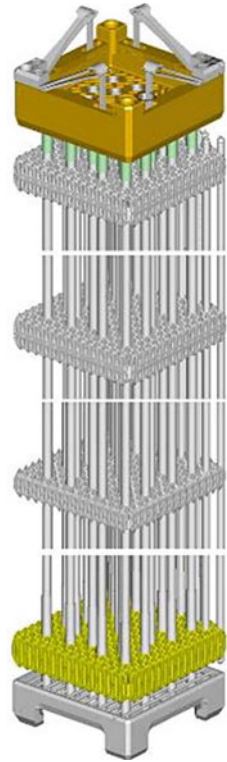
Shows a fuel assembly with fuel rods in place (Courtesy AREVA)
